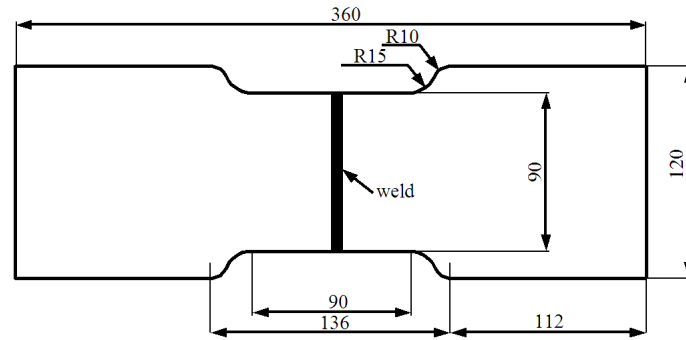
Geometry and dimensions of fatigue test specimen of the laser welded butt joint [15]
